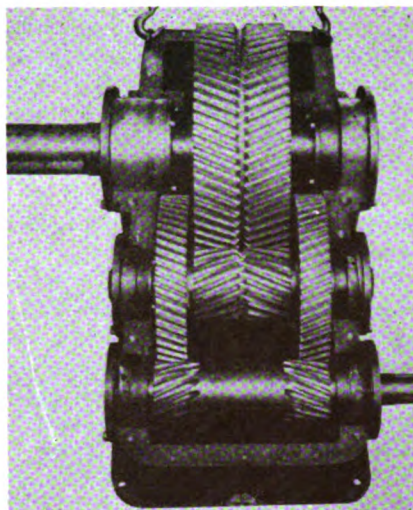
This is a double-reduction type herringbone gear speed reducer.
